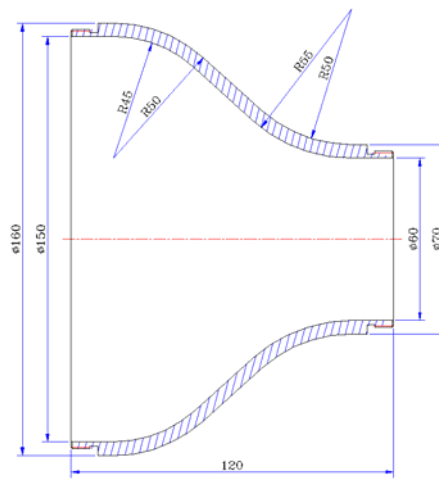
Two-dimensional drawing of inner reducer (mm)
